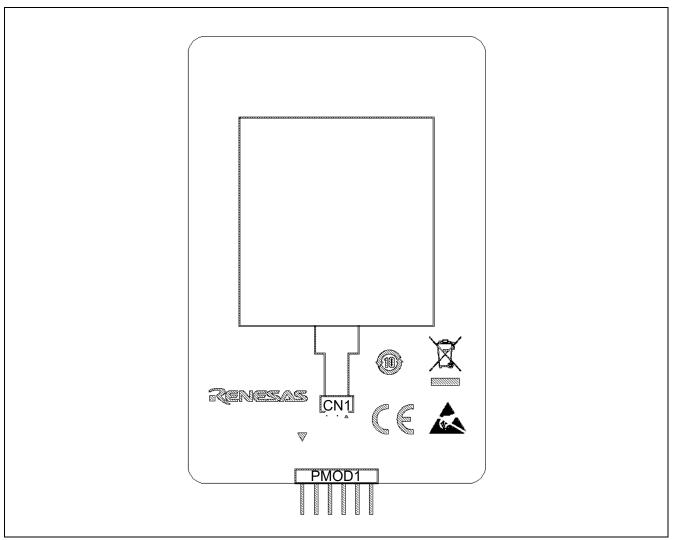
MIP-LCD Expansion Board Component Placement (Top)
